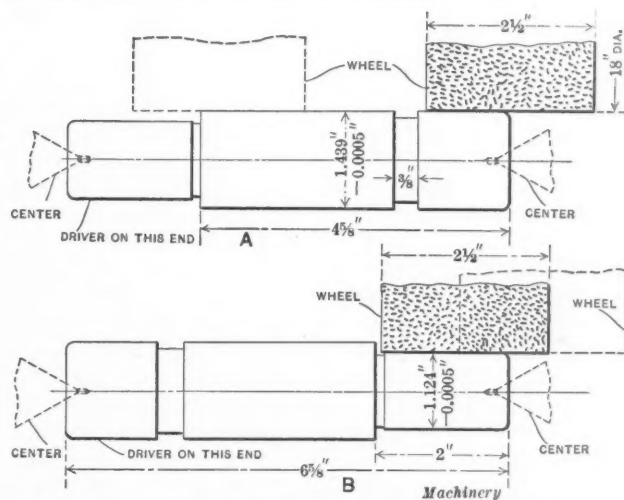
Intermediate Shaft for Milling Machine ground by "Fixed-wheel" Method
